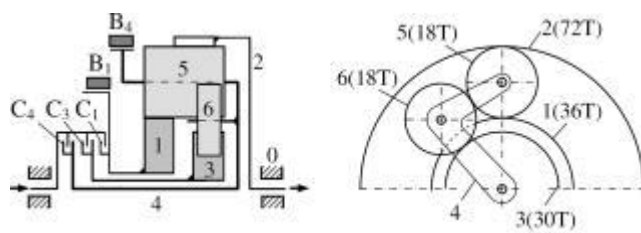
Schematic figure of Ravigneaux gear mechanism (ASME, 2016)
